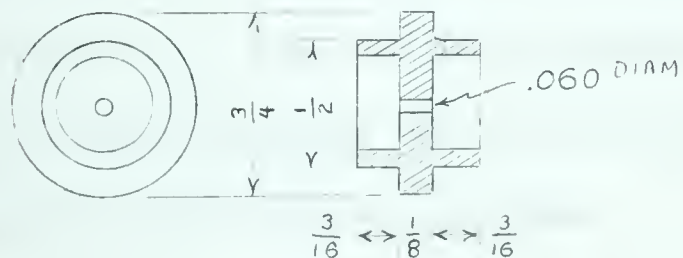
Side Counter Wall Outlines (Shown approximately half size; material: 10 mil stainless steel sheet)
